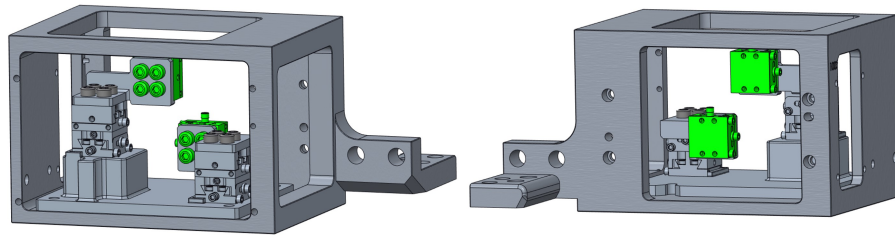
Vertical Stages Implemented in the Housing, Back View (Left), Front View (Right)
